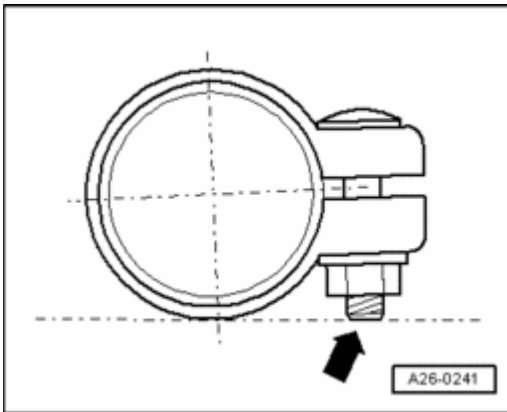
Installing sleeve clamps so screws are at right and screw ends do not project out over lower edge
